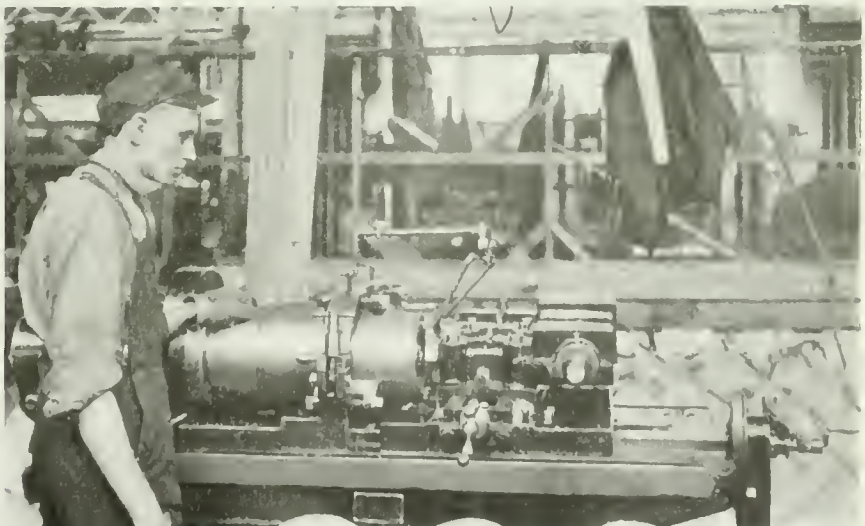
MILLING BASE THREADS IN DUPLEX MACHINE.
